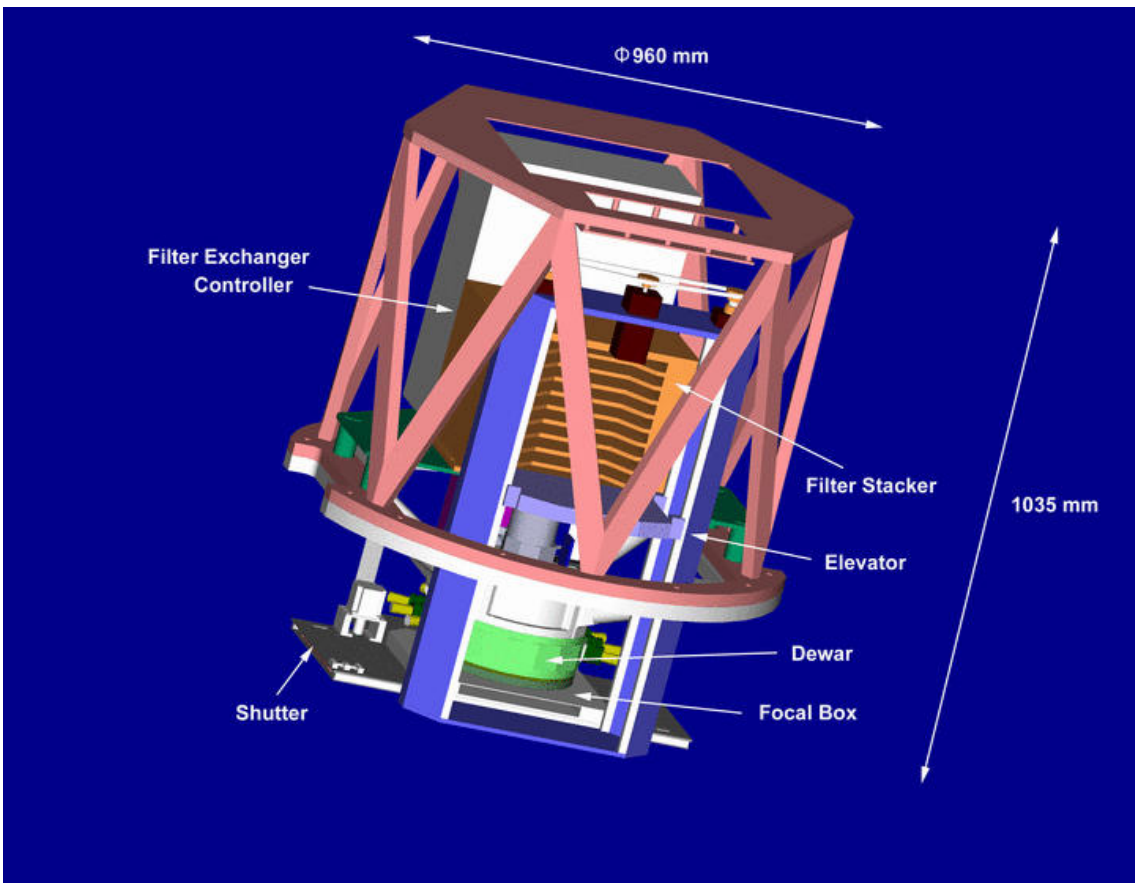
Schematic view of Suprime-Cam. The major mechanical components are shown inside.
